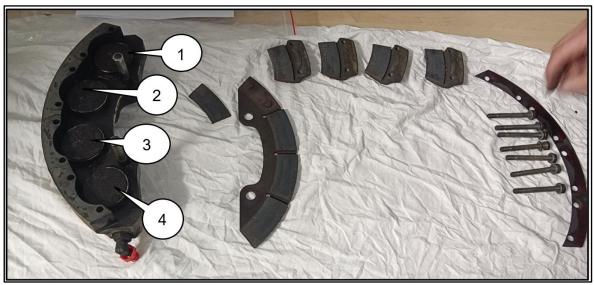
The brake calliper components with numbers pointing to the brake cylinder pistons.
